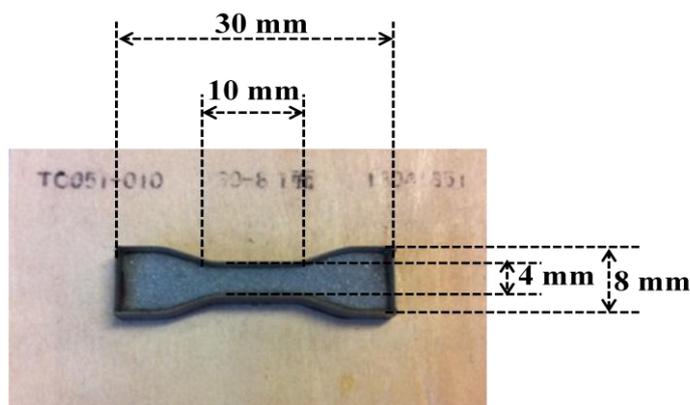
Specimen cast cutter and dimensions of film to be prepared.
